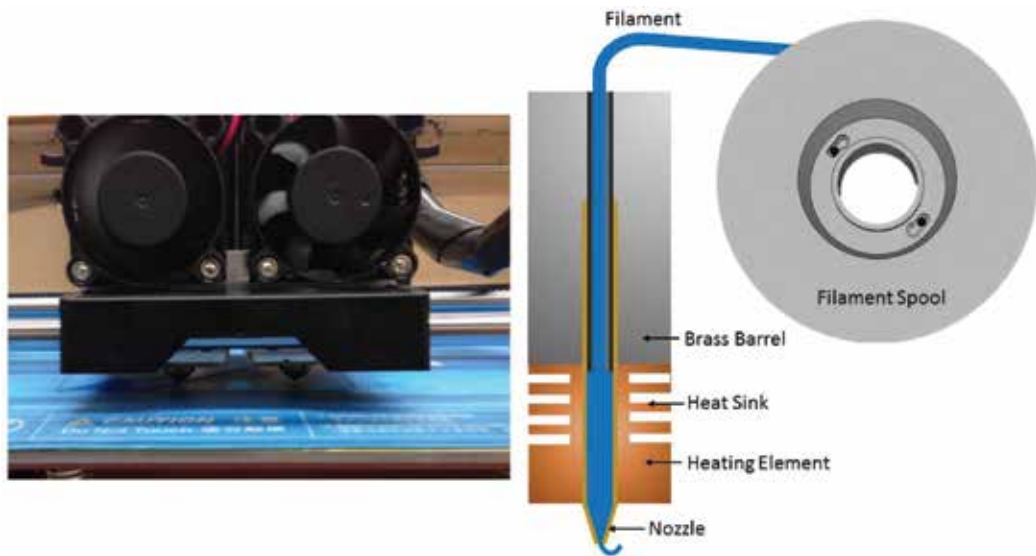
A picture of a dual extruder assembly from a FDM printer and a schematic of the extruder.
